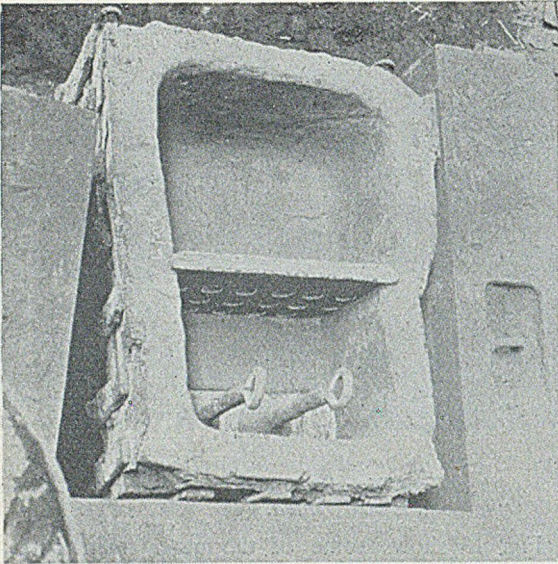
Brick-built Loam-coated Runner Box incorporating Flat Stoppers and a Filter Core.
